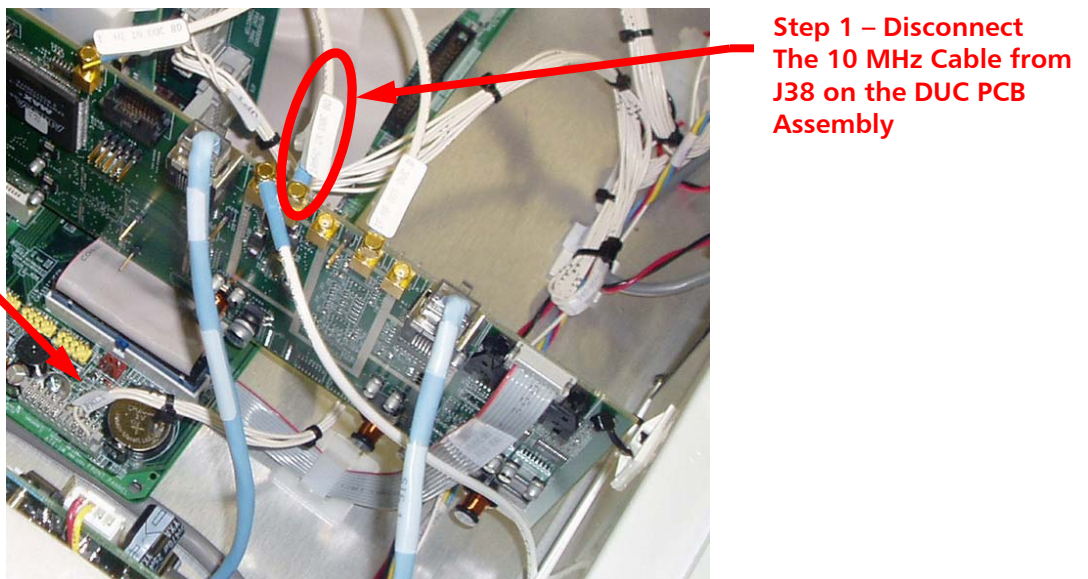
Disconnect 10 MHz Cable from DUC PCB Assembly
